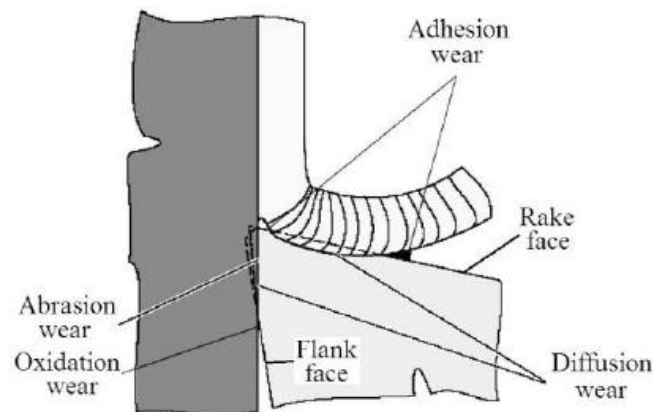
Flank and rake faces where flank and crater wear occur (Viktor, 2011)
